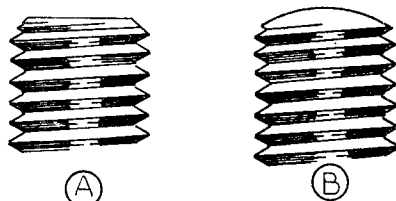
A screw with a chamfered end, "A"; and with rounded end, "B."
